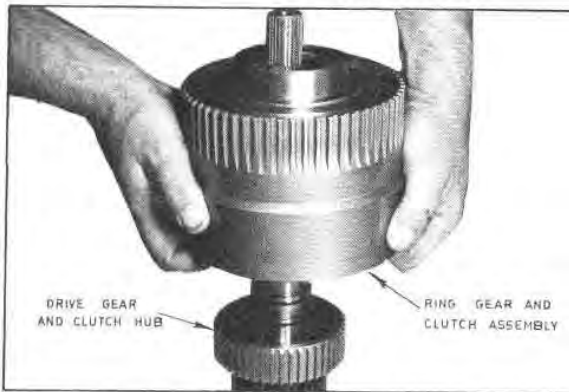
Removing the Ring Gear and Clutch Assembly
